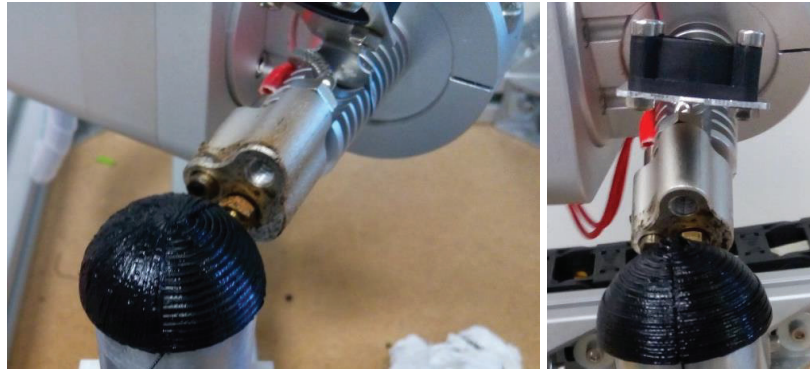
5-Axis Material Extrusion: (left) Combined Print, (right) Horizontal Print
